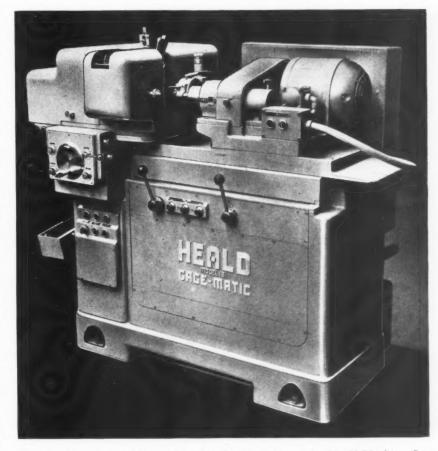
New Internal Centerless Grinder Brought out by Heald Machine Co.
